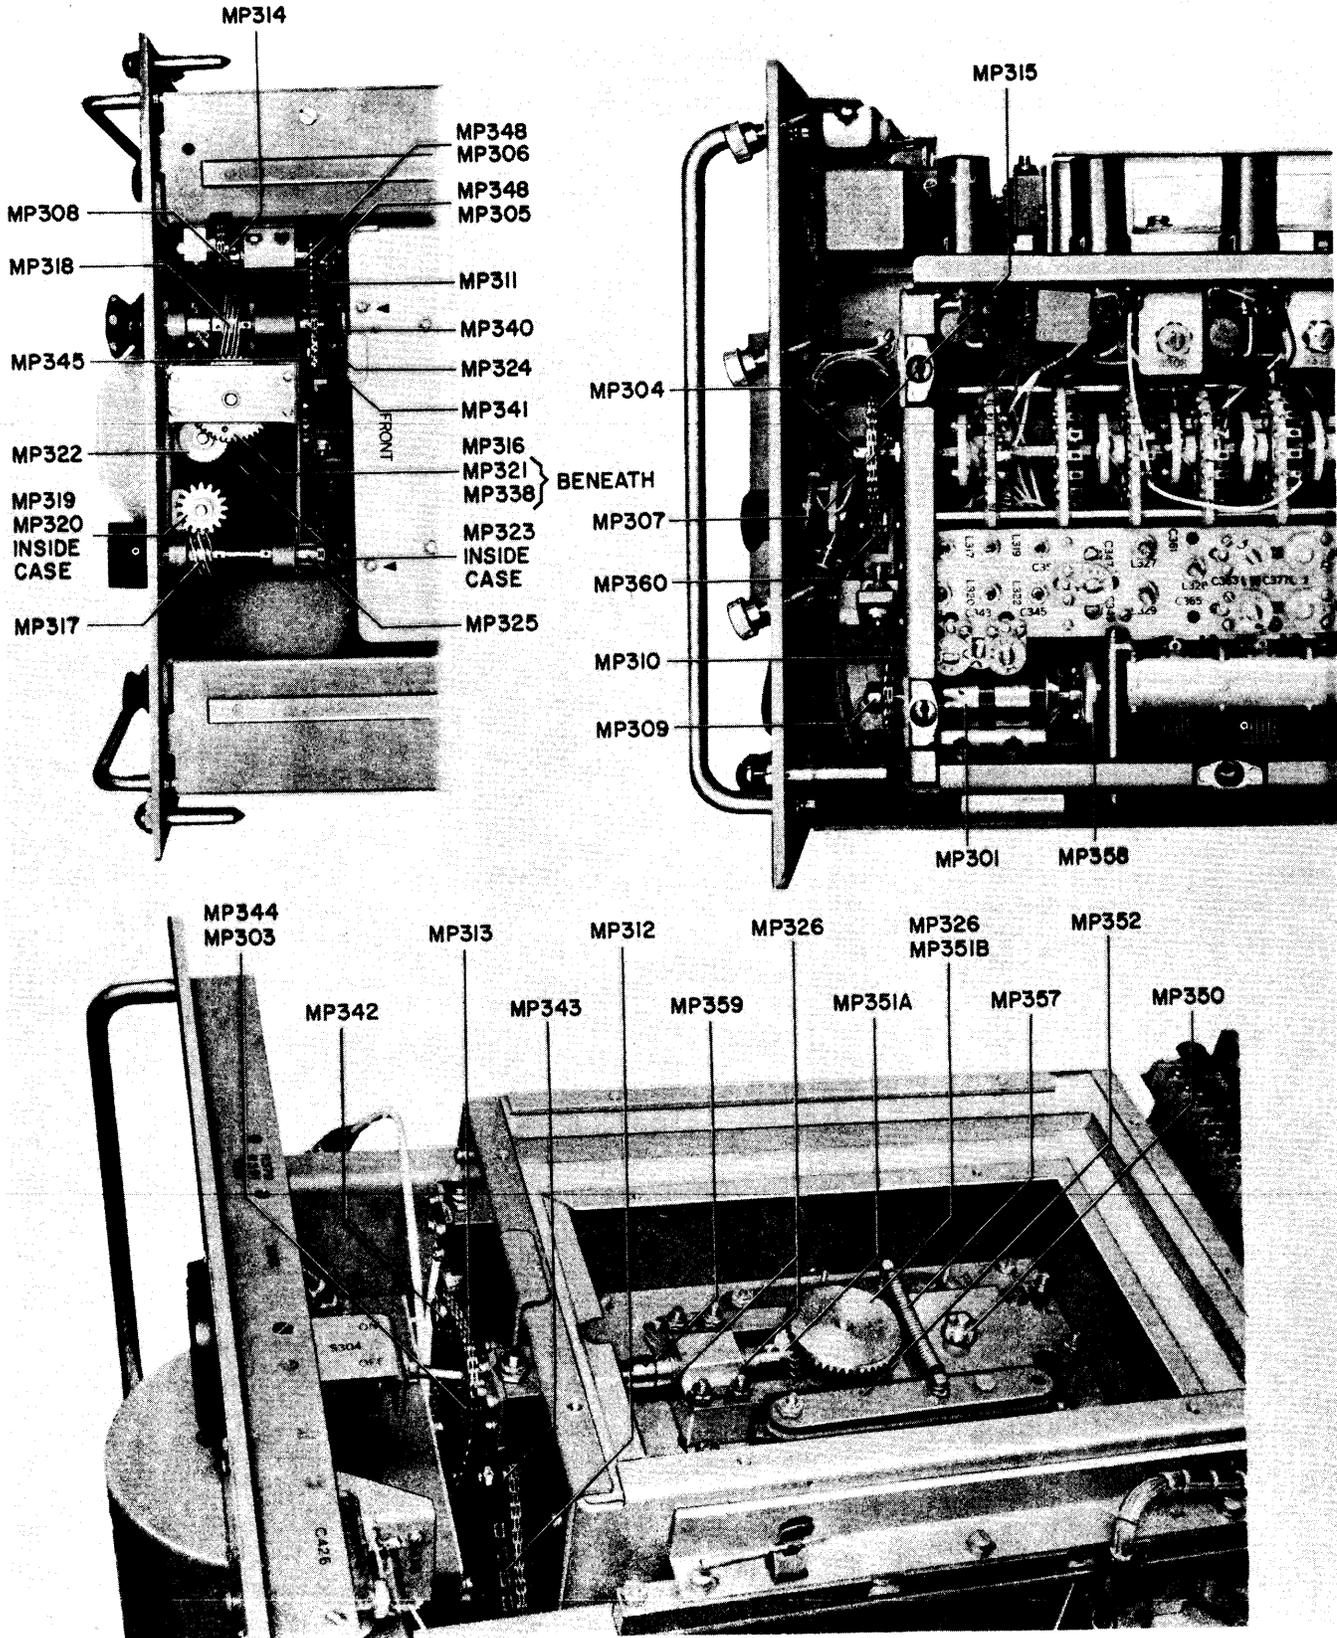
Radi Frequency Oscillator O-581/WRT-2, Master Oscillator Gear Train, List of Parts
